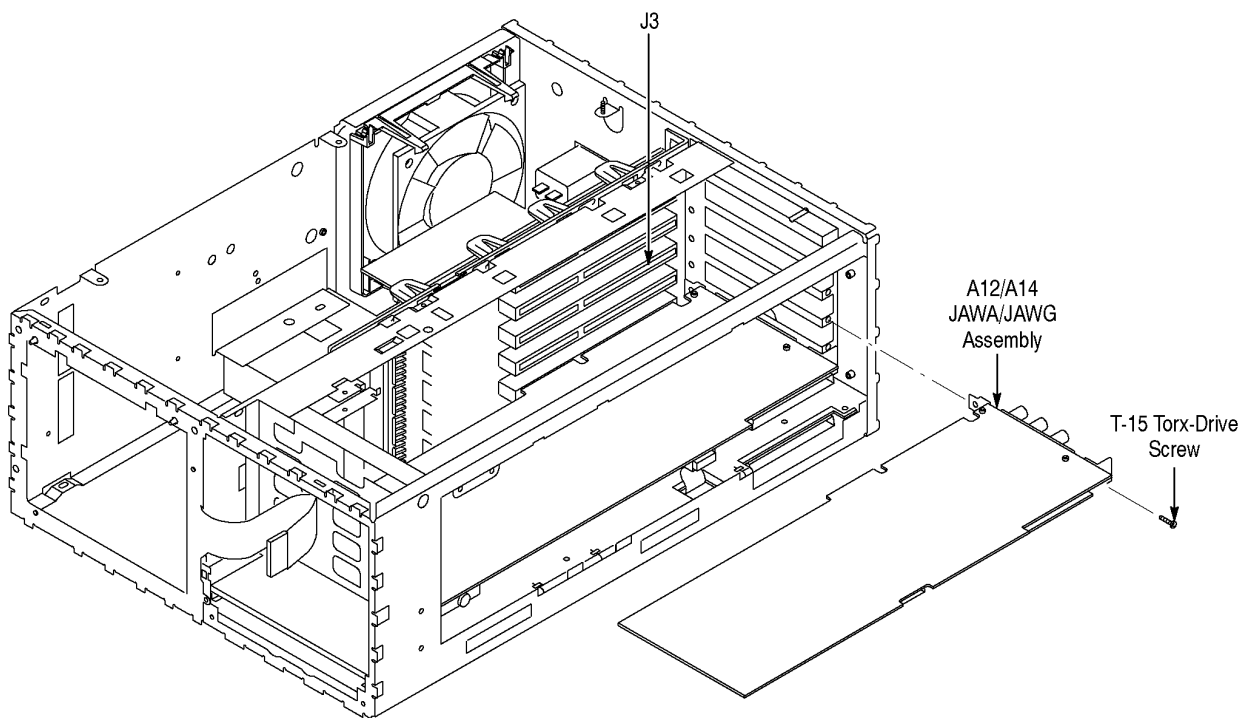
E1/E2/E3 Tributary and E4 Trib Removal
